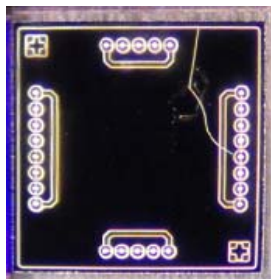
Die Crack on Quadrant 1 Flip Chip Die
